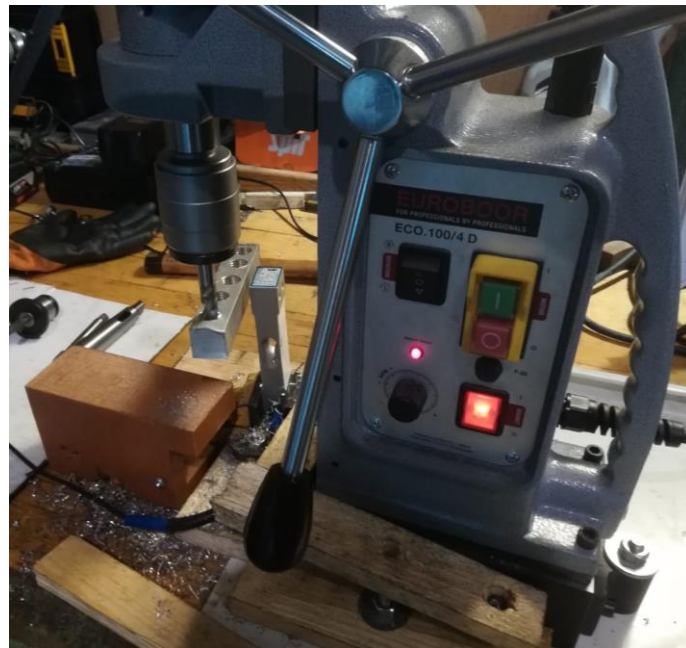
Euroboor ECO.100/4D drilling machine setup for tapping torque measurement
